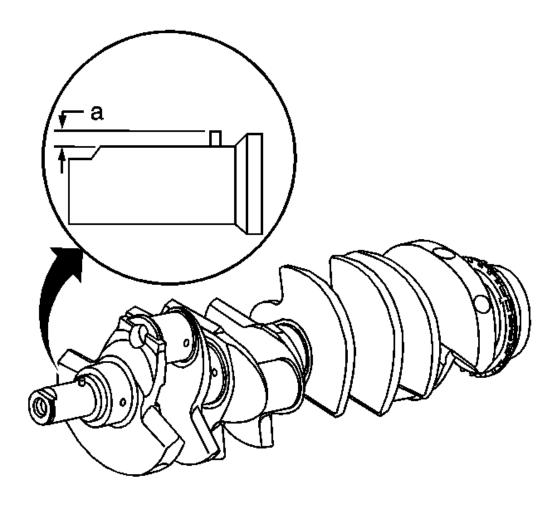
Measuring Crankshaft Pin For Proper Installed Height Courtesy of GENERAL MOTORS CORP.
